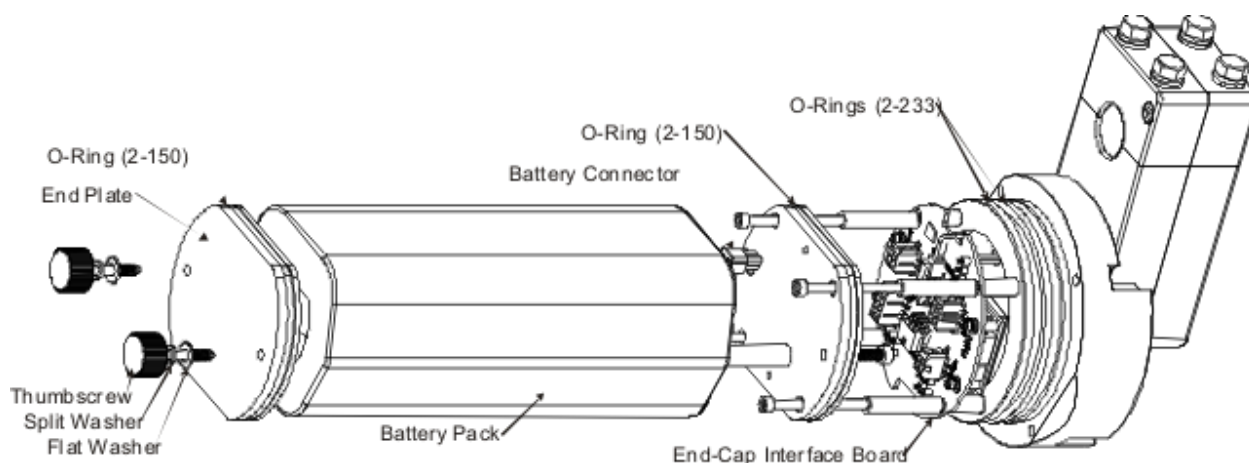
Standard DVS Battery Pack and End-Cap Assembly
